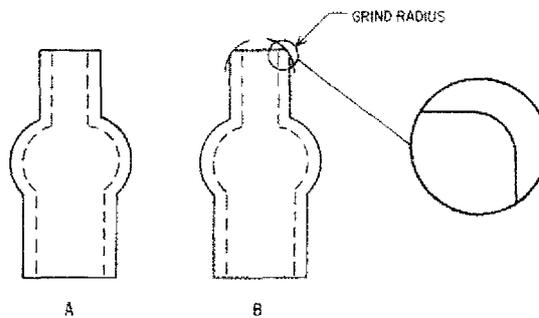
A. Standard nozzle with square edge; B. Nozzle edge rounded to facilitate dragging the GTAW torch when welding a root bead.
